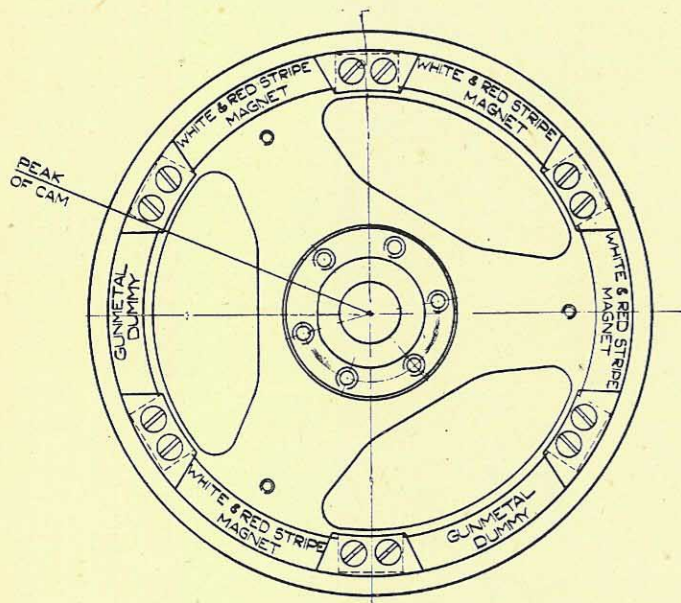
MAGNETO FLYWHEEL ASSEMBLY, MARK 1F AND 2F UNITS.
